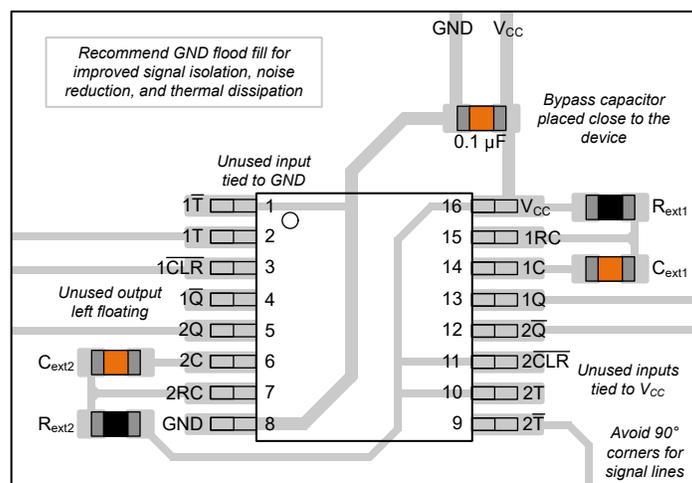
Layout Example for TPUL2T323-Q1 in the PW (TSSOP) package
